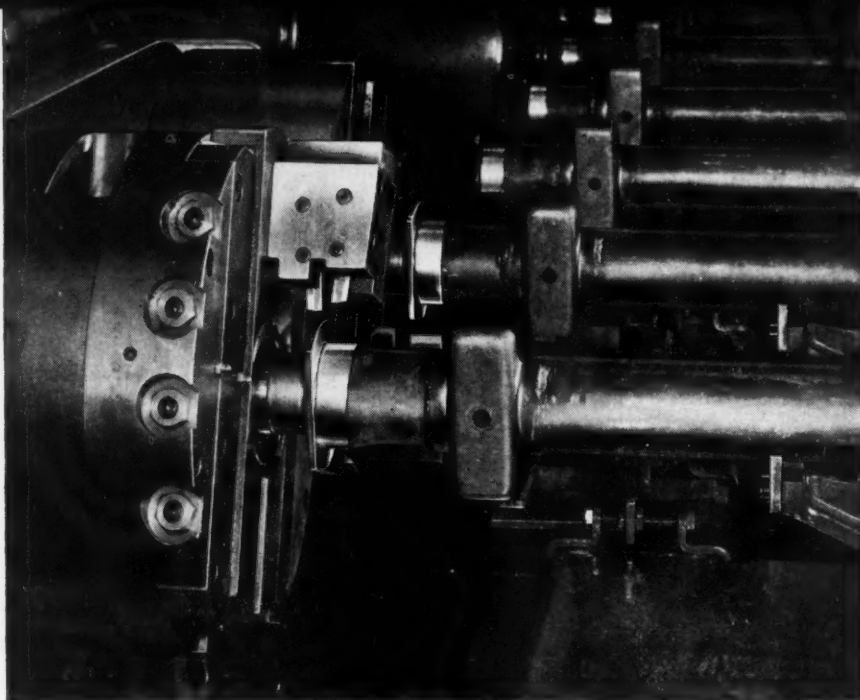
(Left) At the Fourth Machine the End Flange of the Axle Housing is Straddle-faced by a Pair of Single-point, Carbide-tipped Tools
